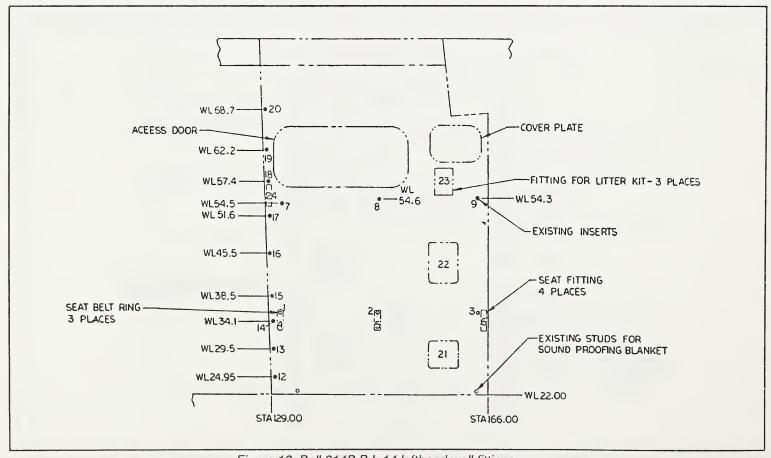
Bell 214B B.L.14 lefthand wall fittings.
